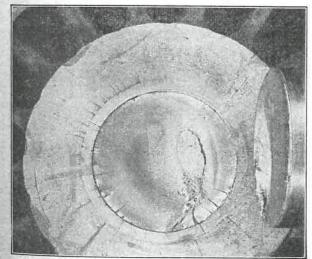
Typical fatigue fracture of shaft, occurring at one end of a fitted part
